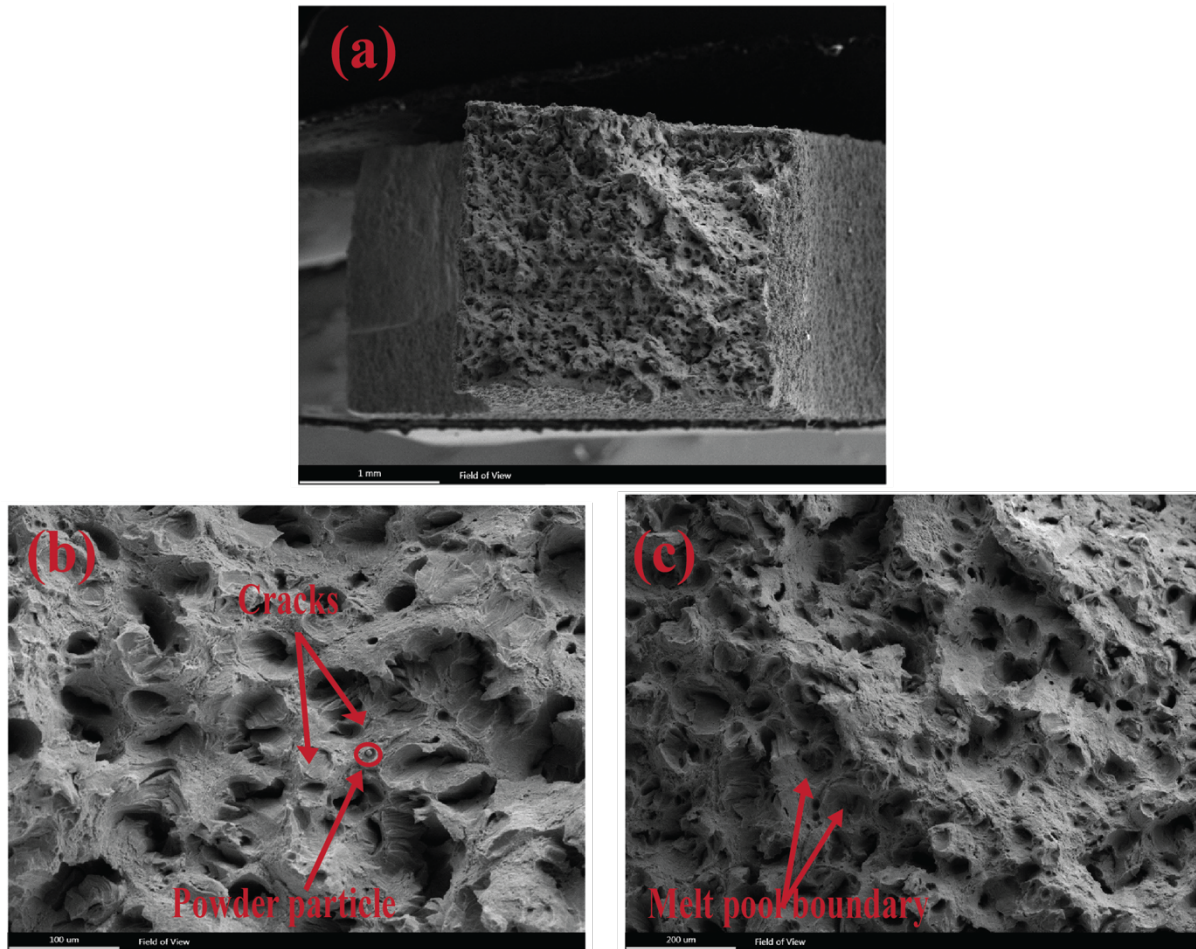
Fracture surfaces of the AISI 316L-2.5% Cu samples
